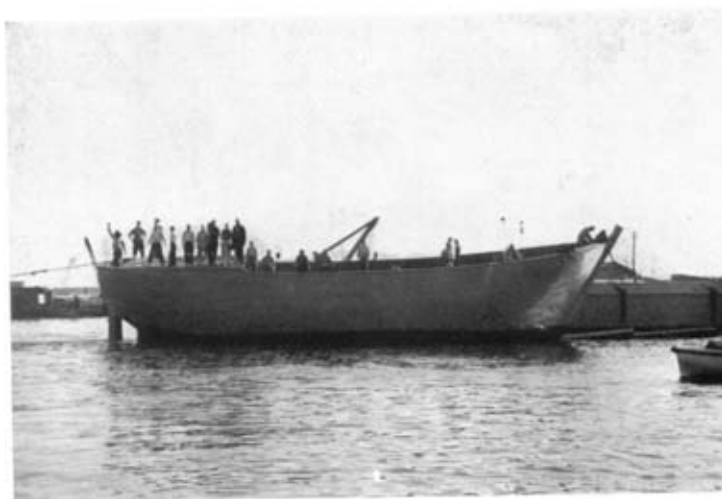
L.W.T. River class barge installing engine and stern gear.
